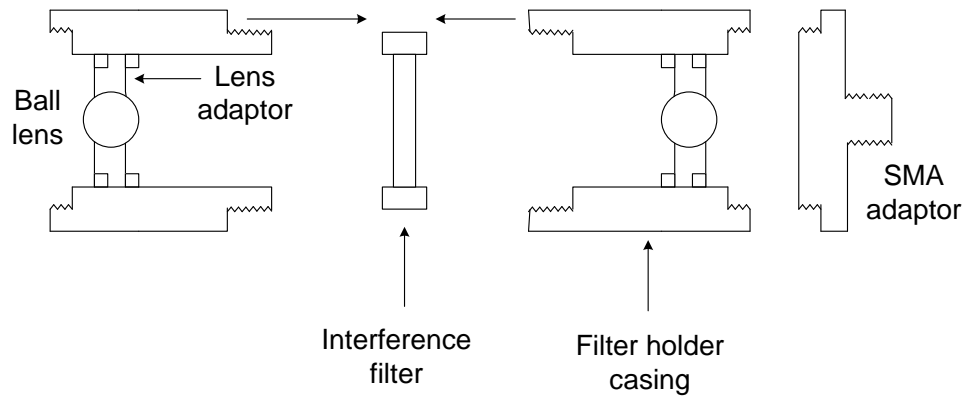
Expanded view of the assembly of the cylindrical filter holder
